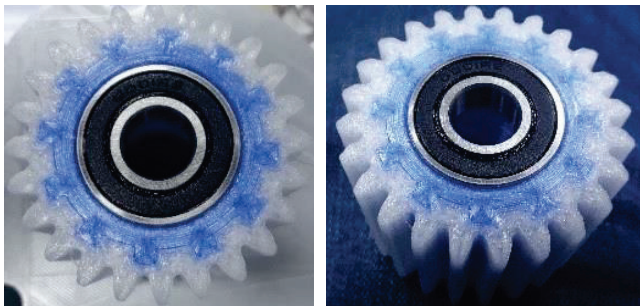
Gears 1 and 2 manufactured by additive manufacturing using two materials
